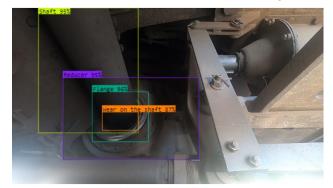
Defect: a displaced reducer flange and worn surface on the axle (shaft)
